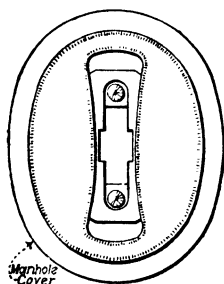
Pressed-steel manhole cover and assembly to boiler plate.
